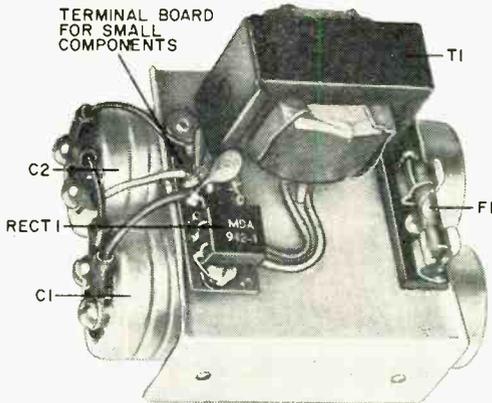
The power supply is built on a 3" x 3" piece of heavy-gauge aluminum with a 1½" mounting lip.
